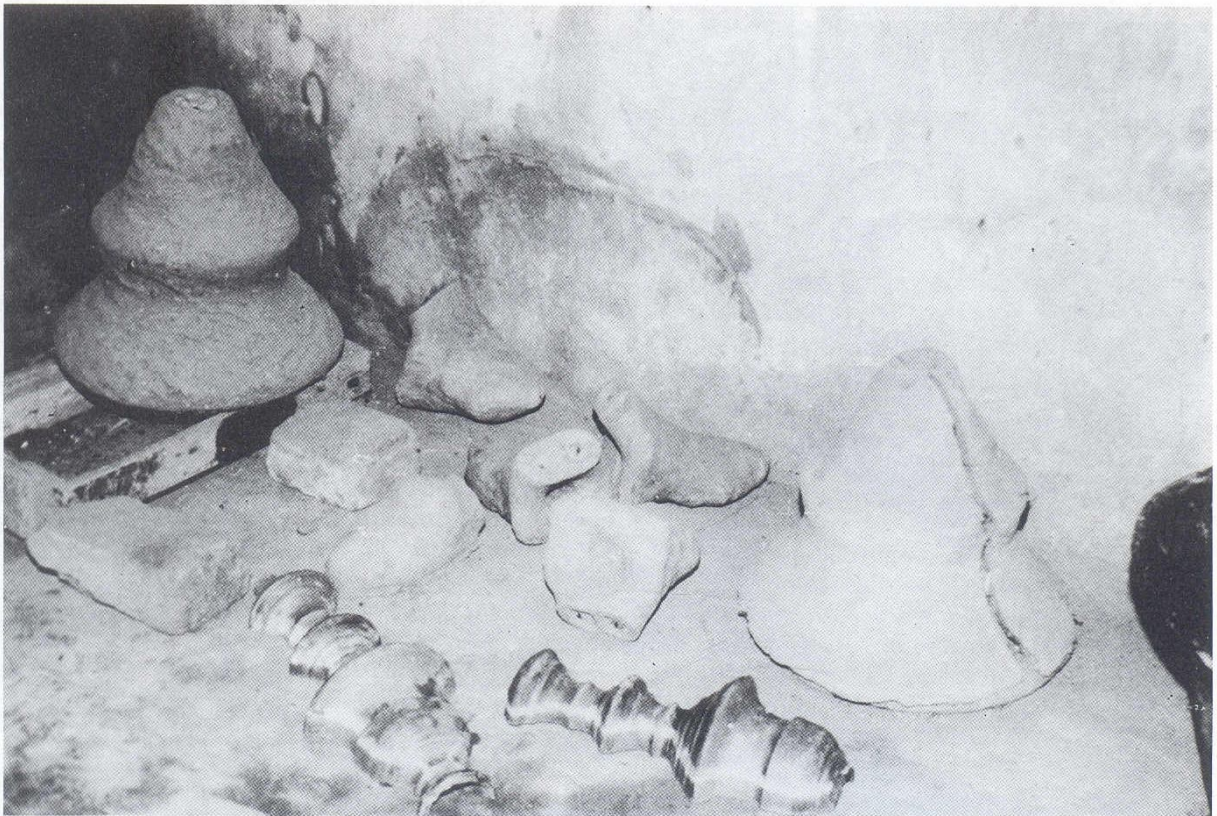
Moulds for casting bells and lamps showing a sprue and a vent. The mould to the right of the picture has had metal poured in it indicated by the slight spillage on one side.
